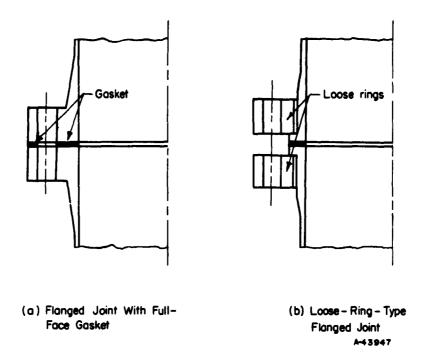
ALTERNATIVE TYPES OF BOLTED FITTINGS
